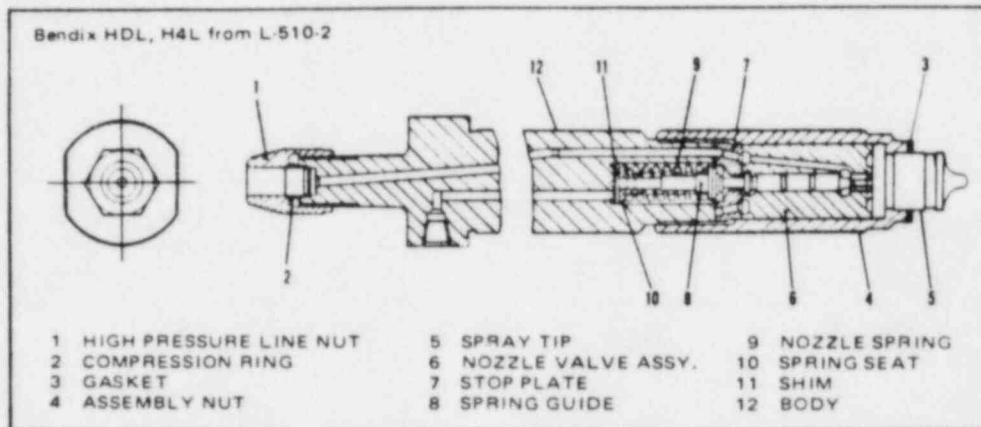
F-1. Sectional View of Typical Nozzle and Holder Assembly
